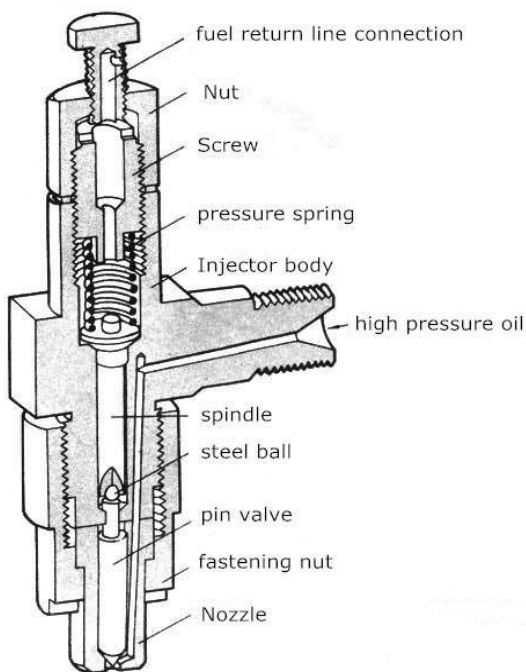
Sectional/Schematic drawing of the M.A.N diesel nozzle
